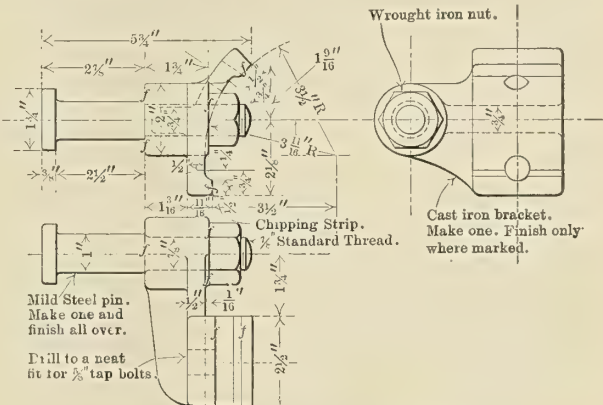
LEVER BRACKET FOR L. P. ENGINE.
